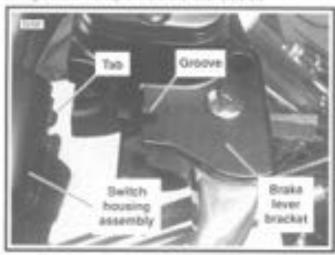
Fit Brake Lever Master Cylinder to Right Handlebox Switch Housings
